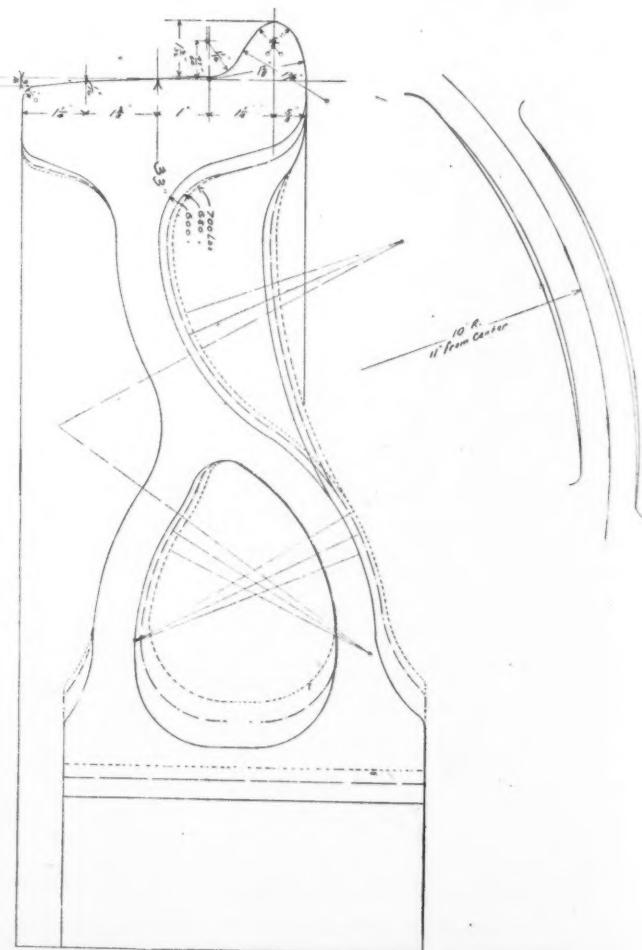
PROPOSED 33 IN. 600, 650 AND 700-LB. CAST IRON WHEEL.
